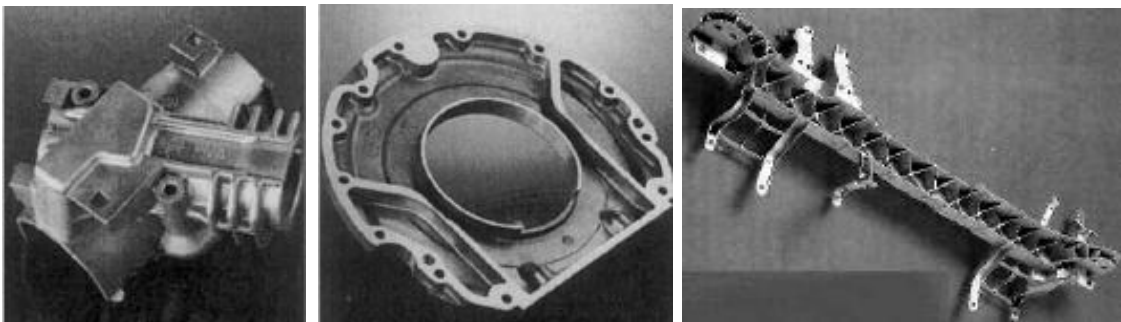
(a) Steering column lock housing (b) sealing flange (c) Steering column (2,11)
